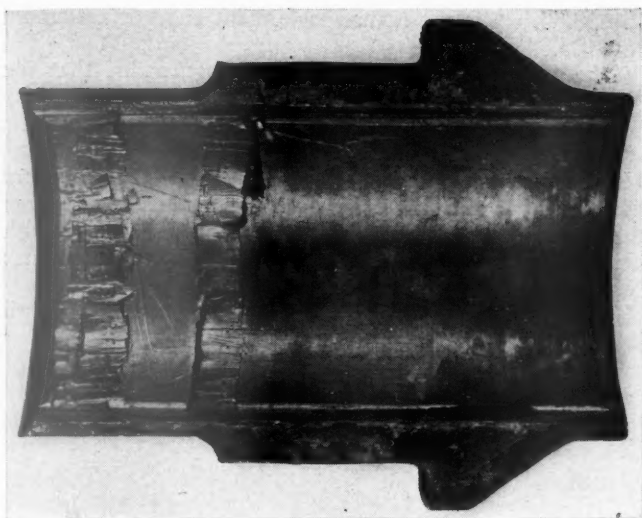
Isn't this something! Two channels were chiseled in the bearing to relieve a cut-journal condition
